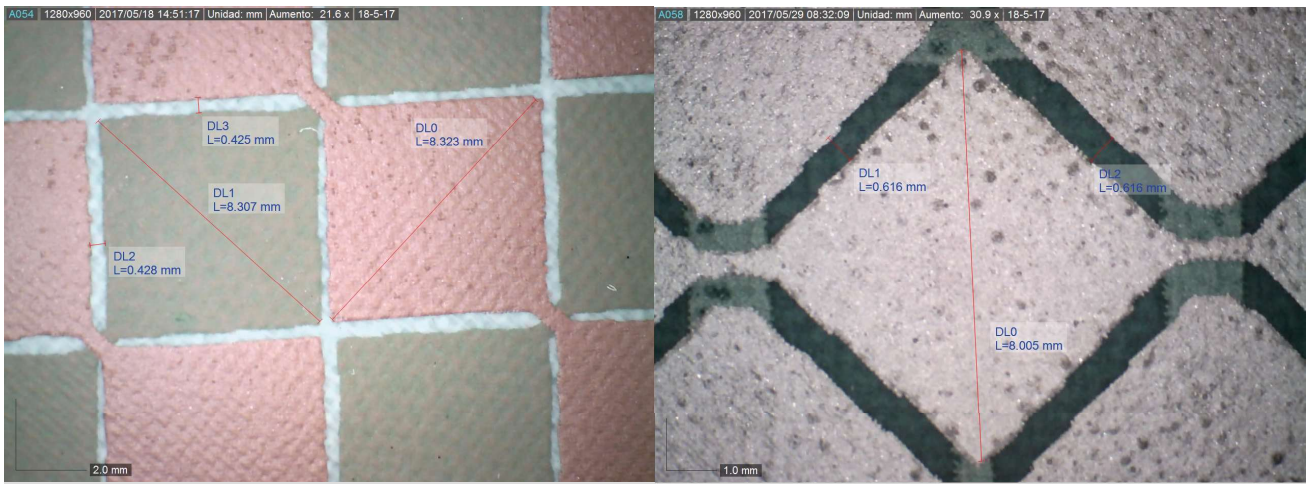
Magnification view of the two design: (left) Two layers design, (right) One layer design.
